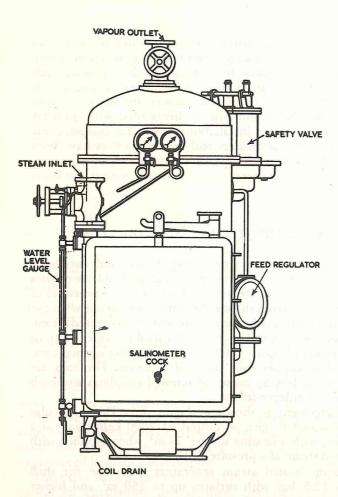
(a) General view of typical vertical low pressure steam heated steam generator Shell: 8 bar working pressure; 16 bar hydraulic test pressure Steambox and coils: 16 bar working pressure; 32 bar hydraulic test pressure
